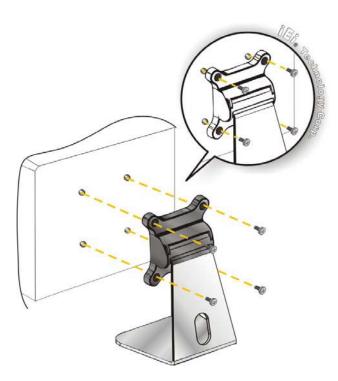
Stand Mounting (Stand-A/Bxx)
